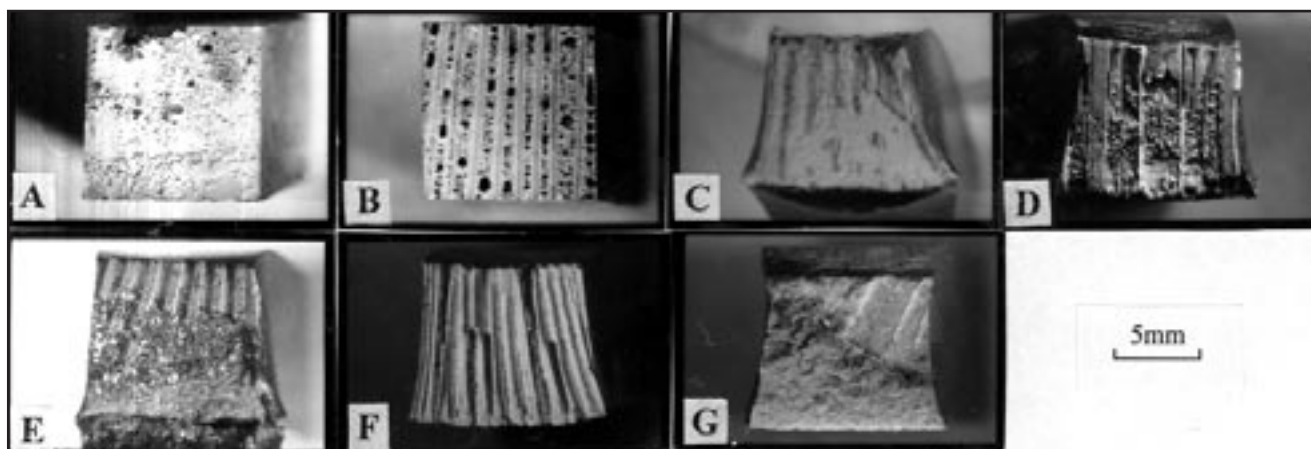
Fracture surfaces after impact test. A — Conventional brazed joint on steel (filler metal: L-Ag40Cd); B — reinforced joint on steel without reinforcement/base-metal coalescence (filler metal: L-Ag40Cd); C — good reinforcement/base-metal coalescence (base metal: copper, reinforcement: copper, filler metal: BCuP-2); D — good reinforcement/base-metal coalescence (base metal: steel with 0.16% C, reinforcement: mild steel, filler metal: L-Ag40Cd); E — good reinforcement/base-metal coalescence (base metal: steel with 0.16% C, reinforcement: austenitic steel 304, filler metal: L-Ag40Cd); F — good reinforcement/base-metal coalescence (base metal and reinforcement: austenitic steel 304, filler metal: BNI-7); G — good reinforcement/base-metal coalescence (base metal and reinforcement: austenitic steel 304, filler metal: L-Ag40Cd).
